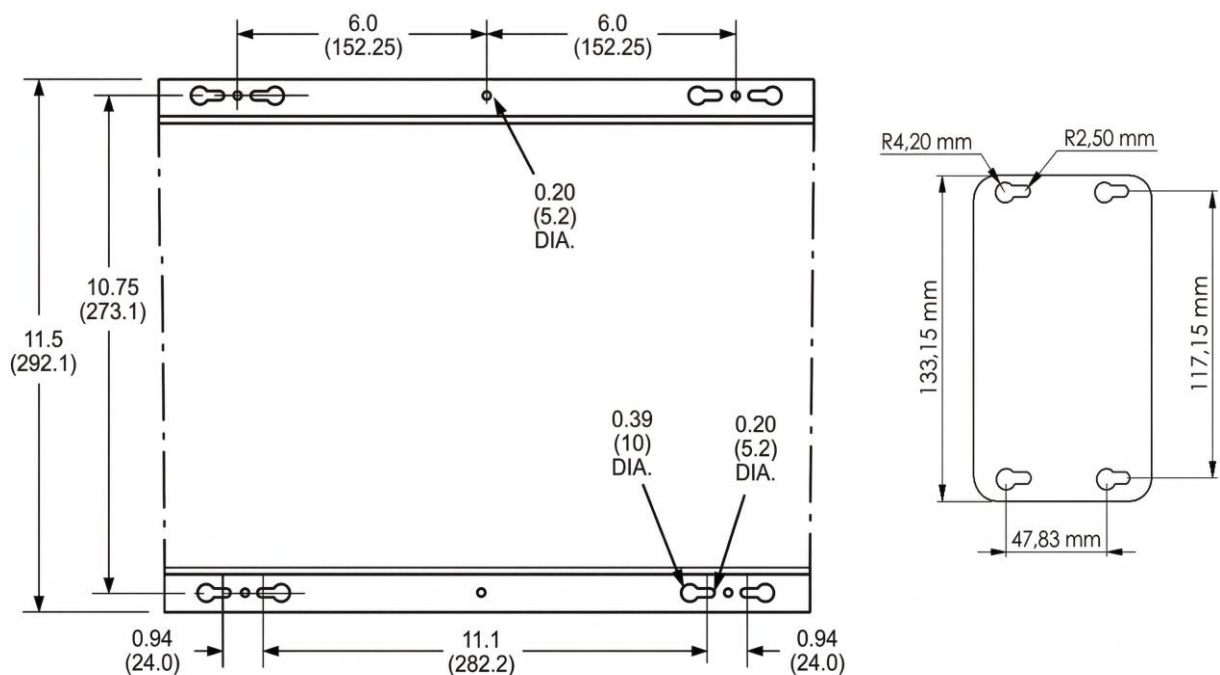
Magnet Monitor and RMMS V4 Dimensions. MagMon dimensions in this diagram are in inches and bracketed () dimensions are in millimeters.
